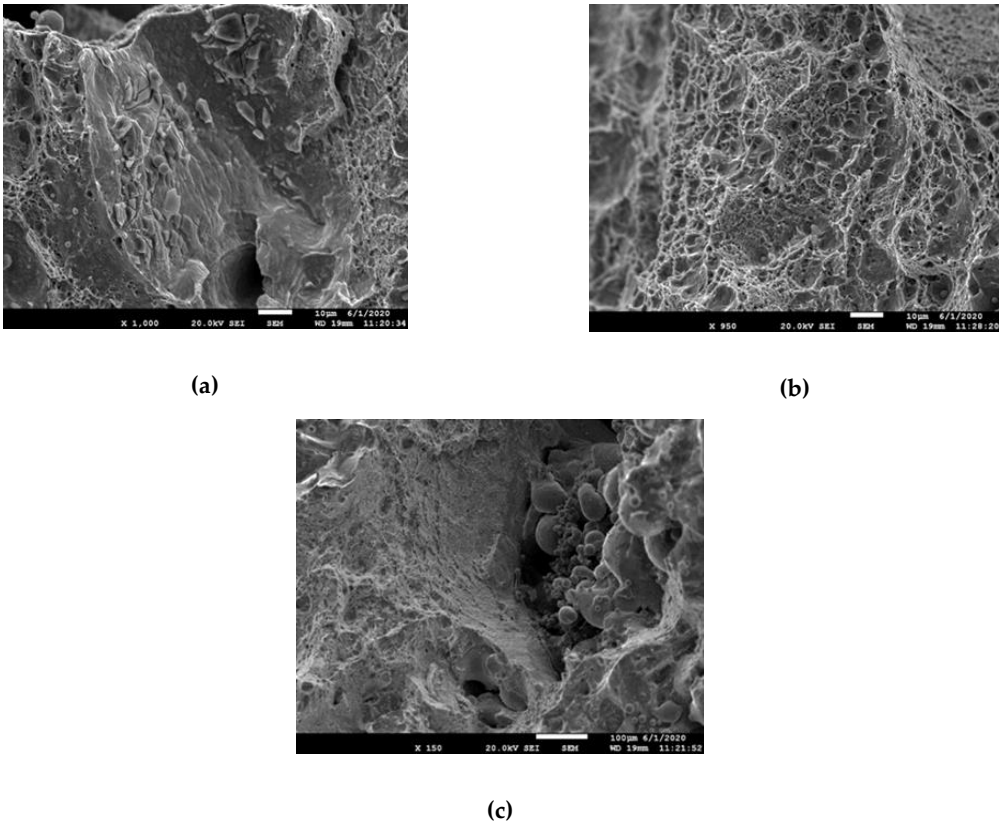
The fractured surface of the Chessboard family 1 (Samples 10-12)
